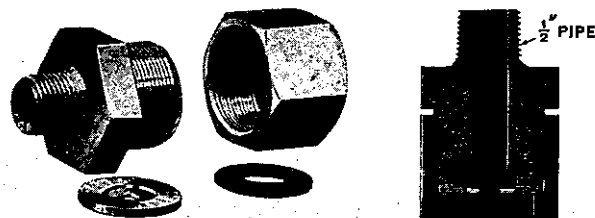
Disassembled View and Sectional View of Disc Holder with Disc
